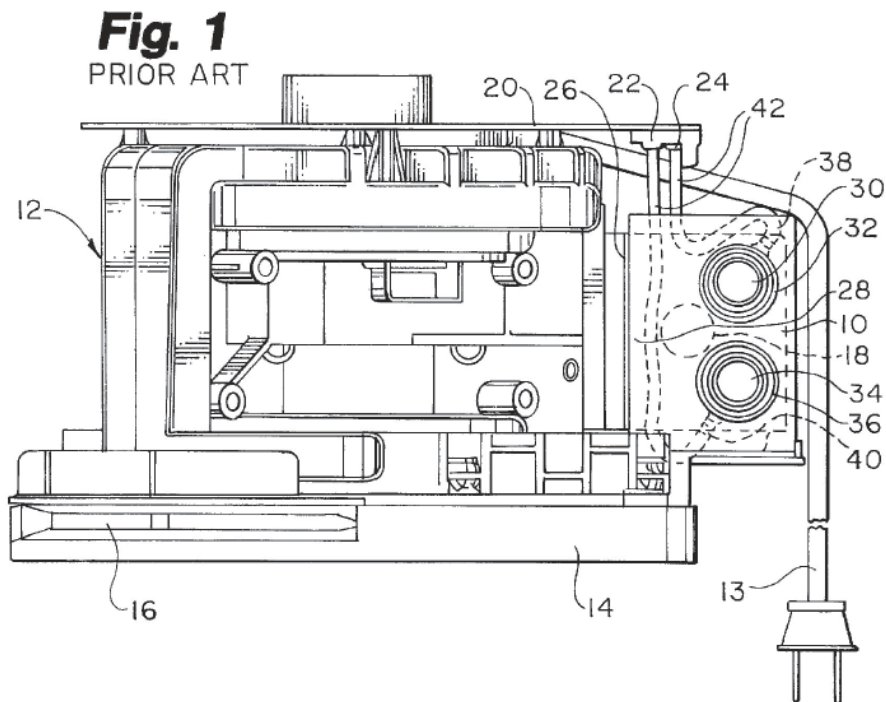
is a front elevational view of prior art valve enclosure assembly 10 coupled to pump 12. *Id.* at 1:13–14, 3:27–28. Air inlet 16 provides inlet air to pump 12, and pressurized air is discharged from pump 12 into prior art valve enclosure assembly 10 through air outlet 18 in the rear face of the valve enclosure assembly. *Id.* at 1:16–20. Front face 28 of prior art valve
